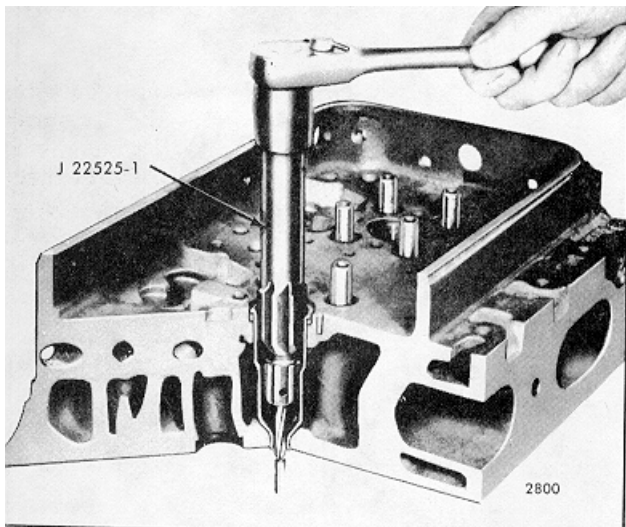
Reaming Injector Tube for Injector Body Nut and Spray Tip
